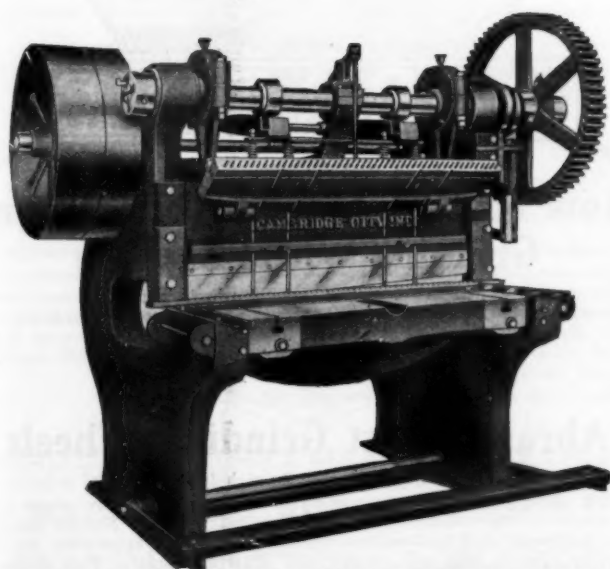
shows the punch-cross-head disengaged, thus converting the machine into a regular shear for shearing only.
